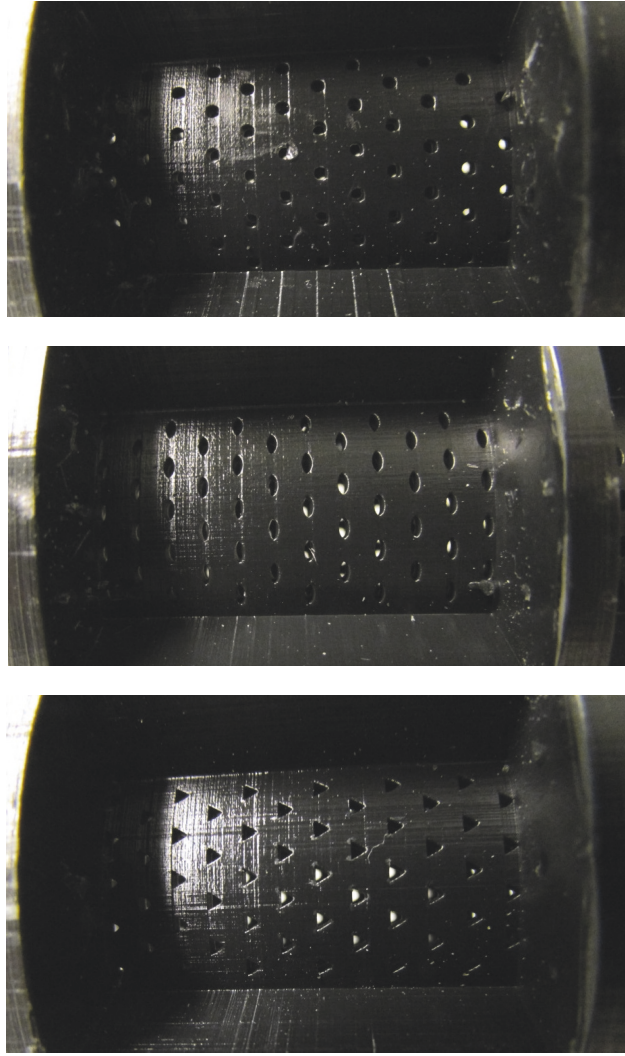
Top: option C circular holes; middle: eye-shaped holes; bottom: triangular holes. Perforation ratio is 10% and the material thickness is 1.5 mm for all variants.
